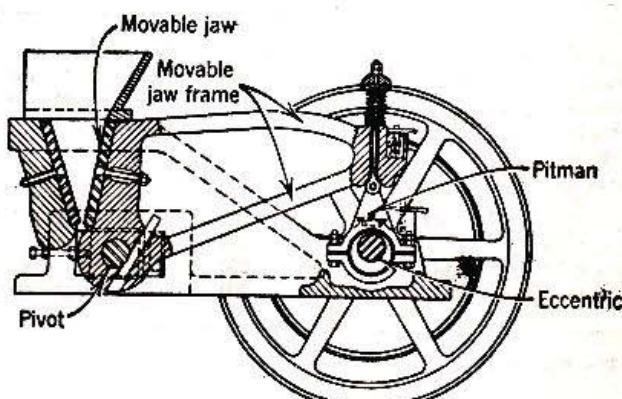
Sectional drawing of Dodge-type jaw crusher.
